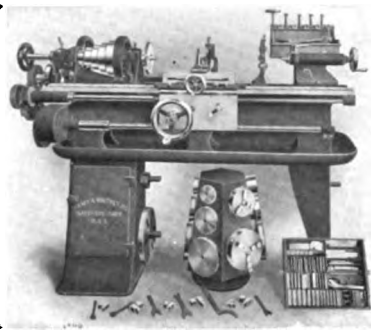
Pratt & Whitney Tool Makers' Lathe
